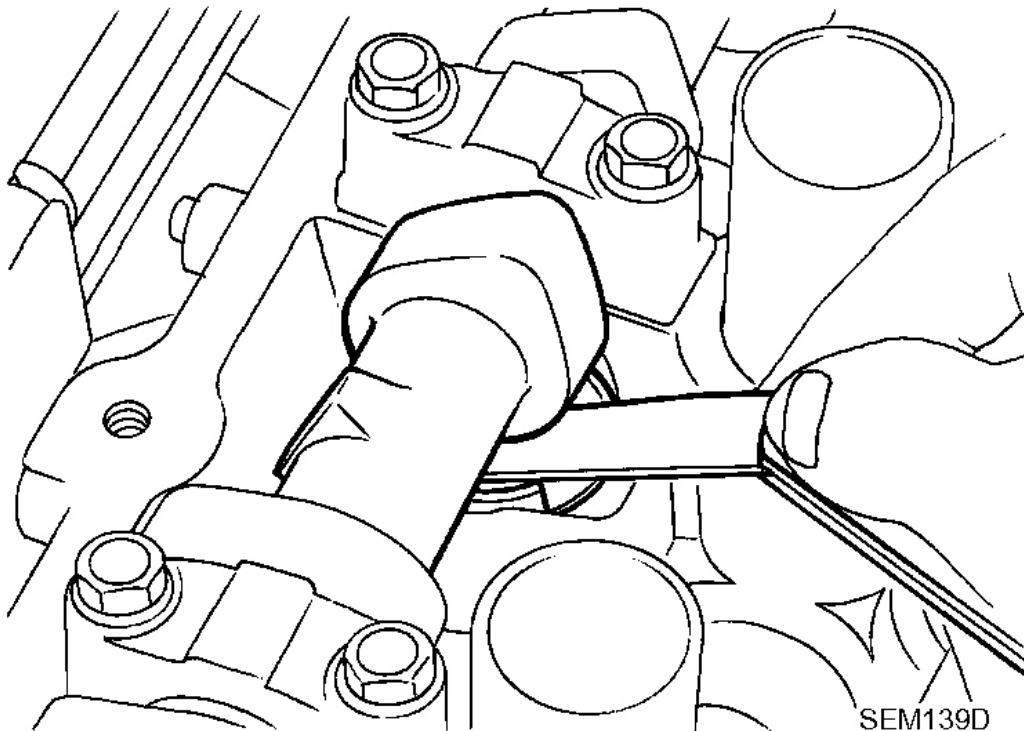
Identifying Clearance Between Valve Lifter And Camshaft By Using Feeler Gauge
